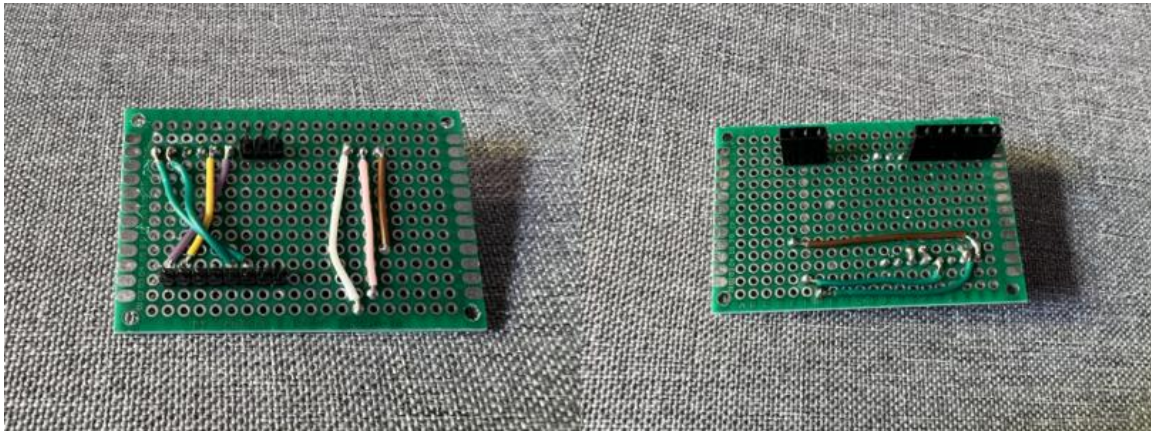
Two sides of soldered PCB, with sockets for MCU, PIR and mmWave sensors.
